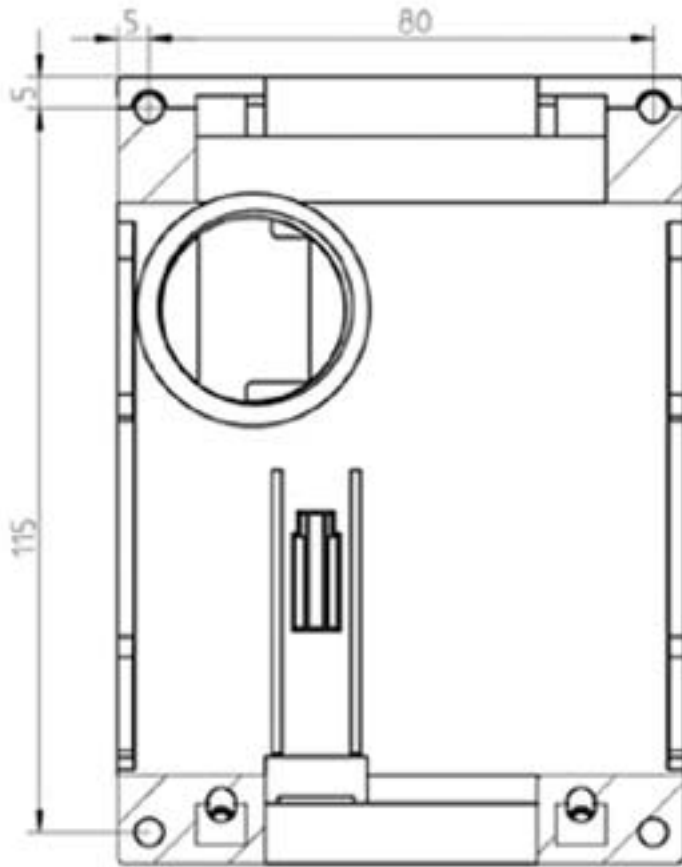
Dimension Drawing SCALANCE X208PRO
